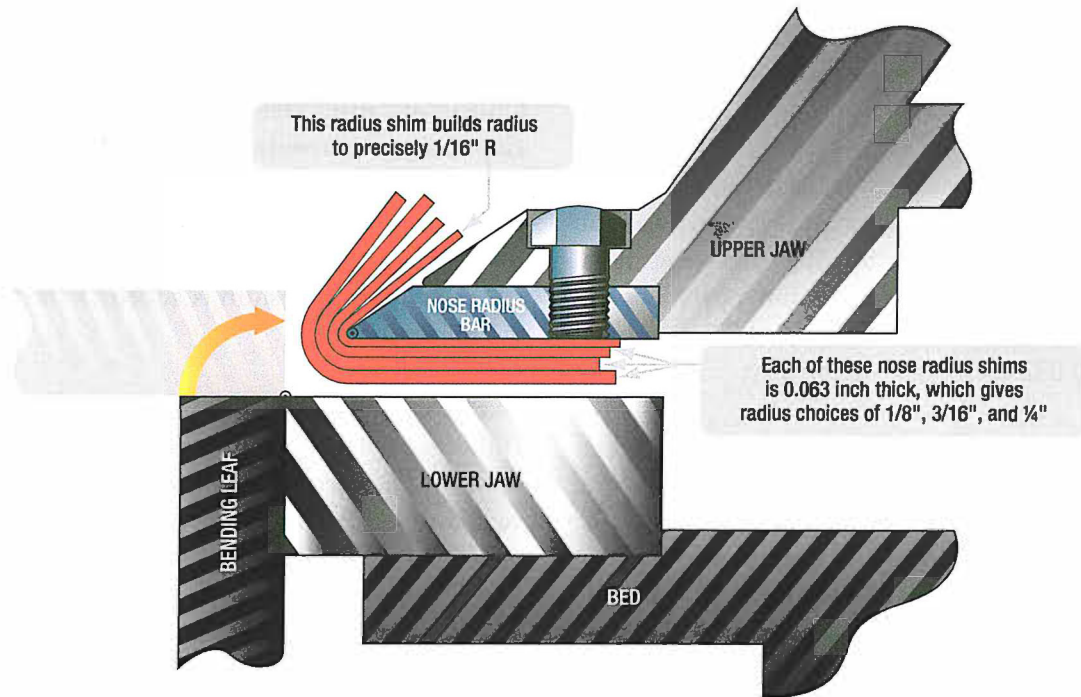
Nose radius shims may be used when the brake radius bar is smaller than required.
